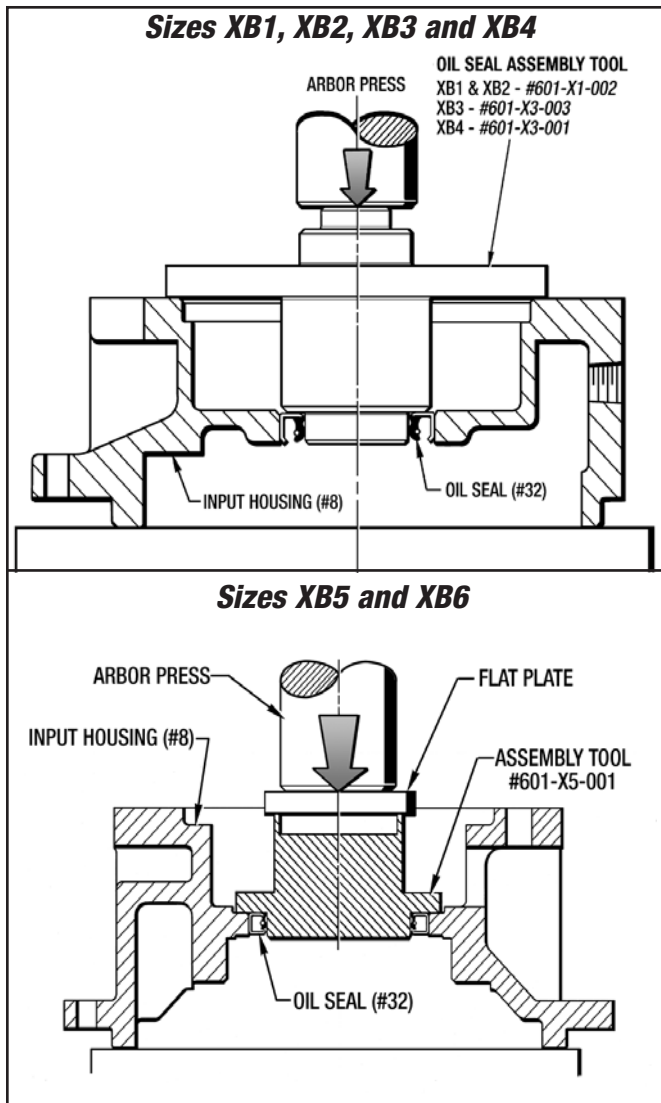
Installing Oil Seal (#32) in the Input Housing
